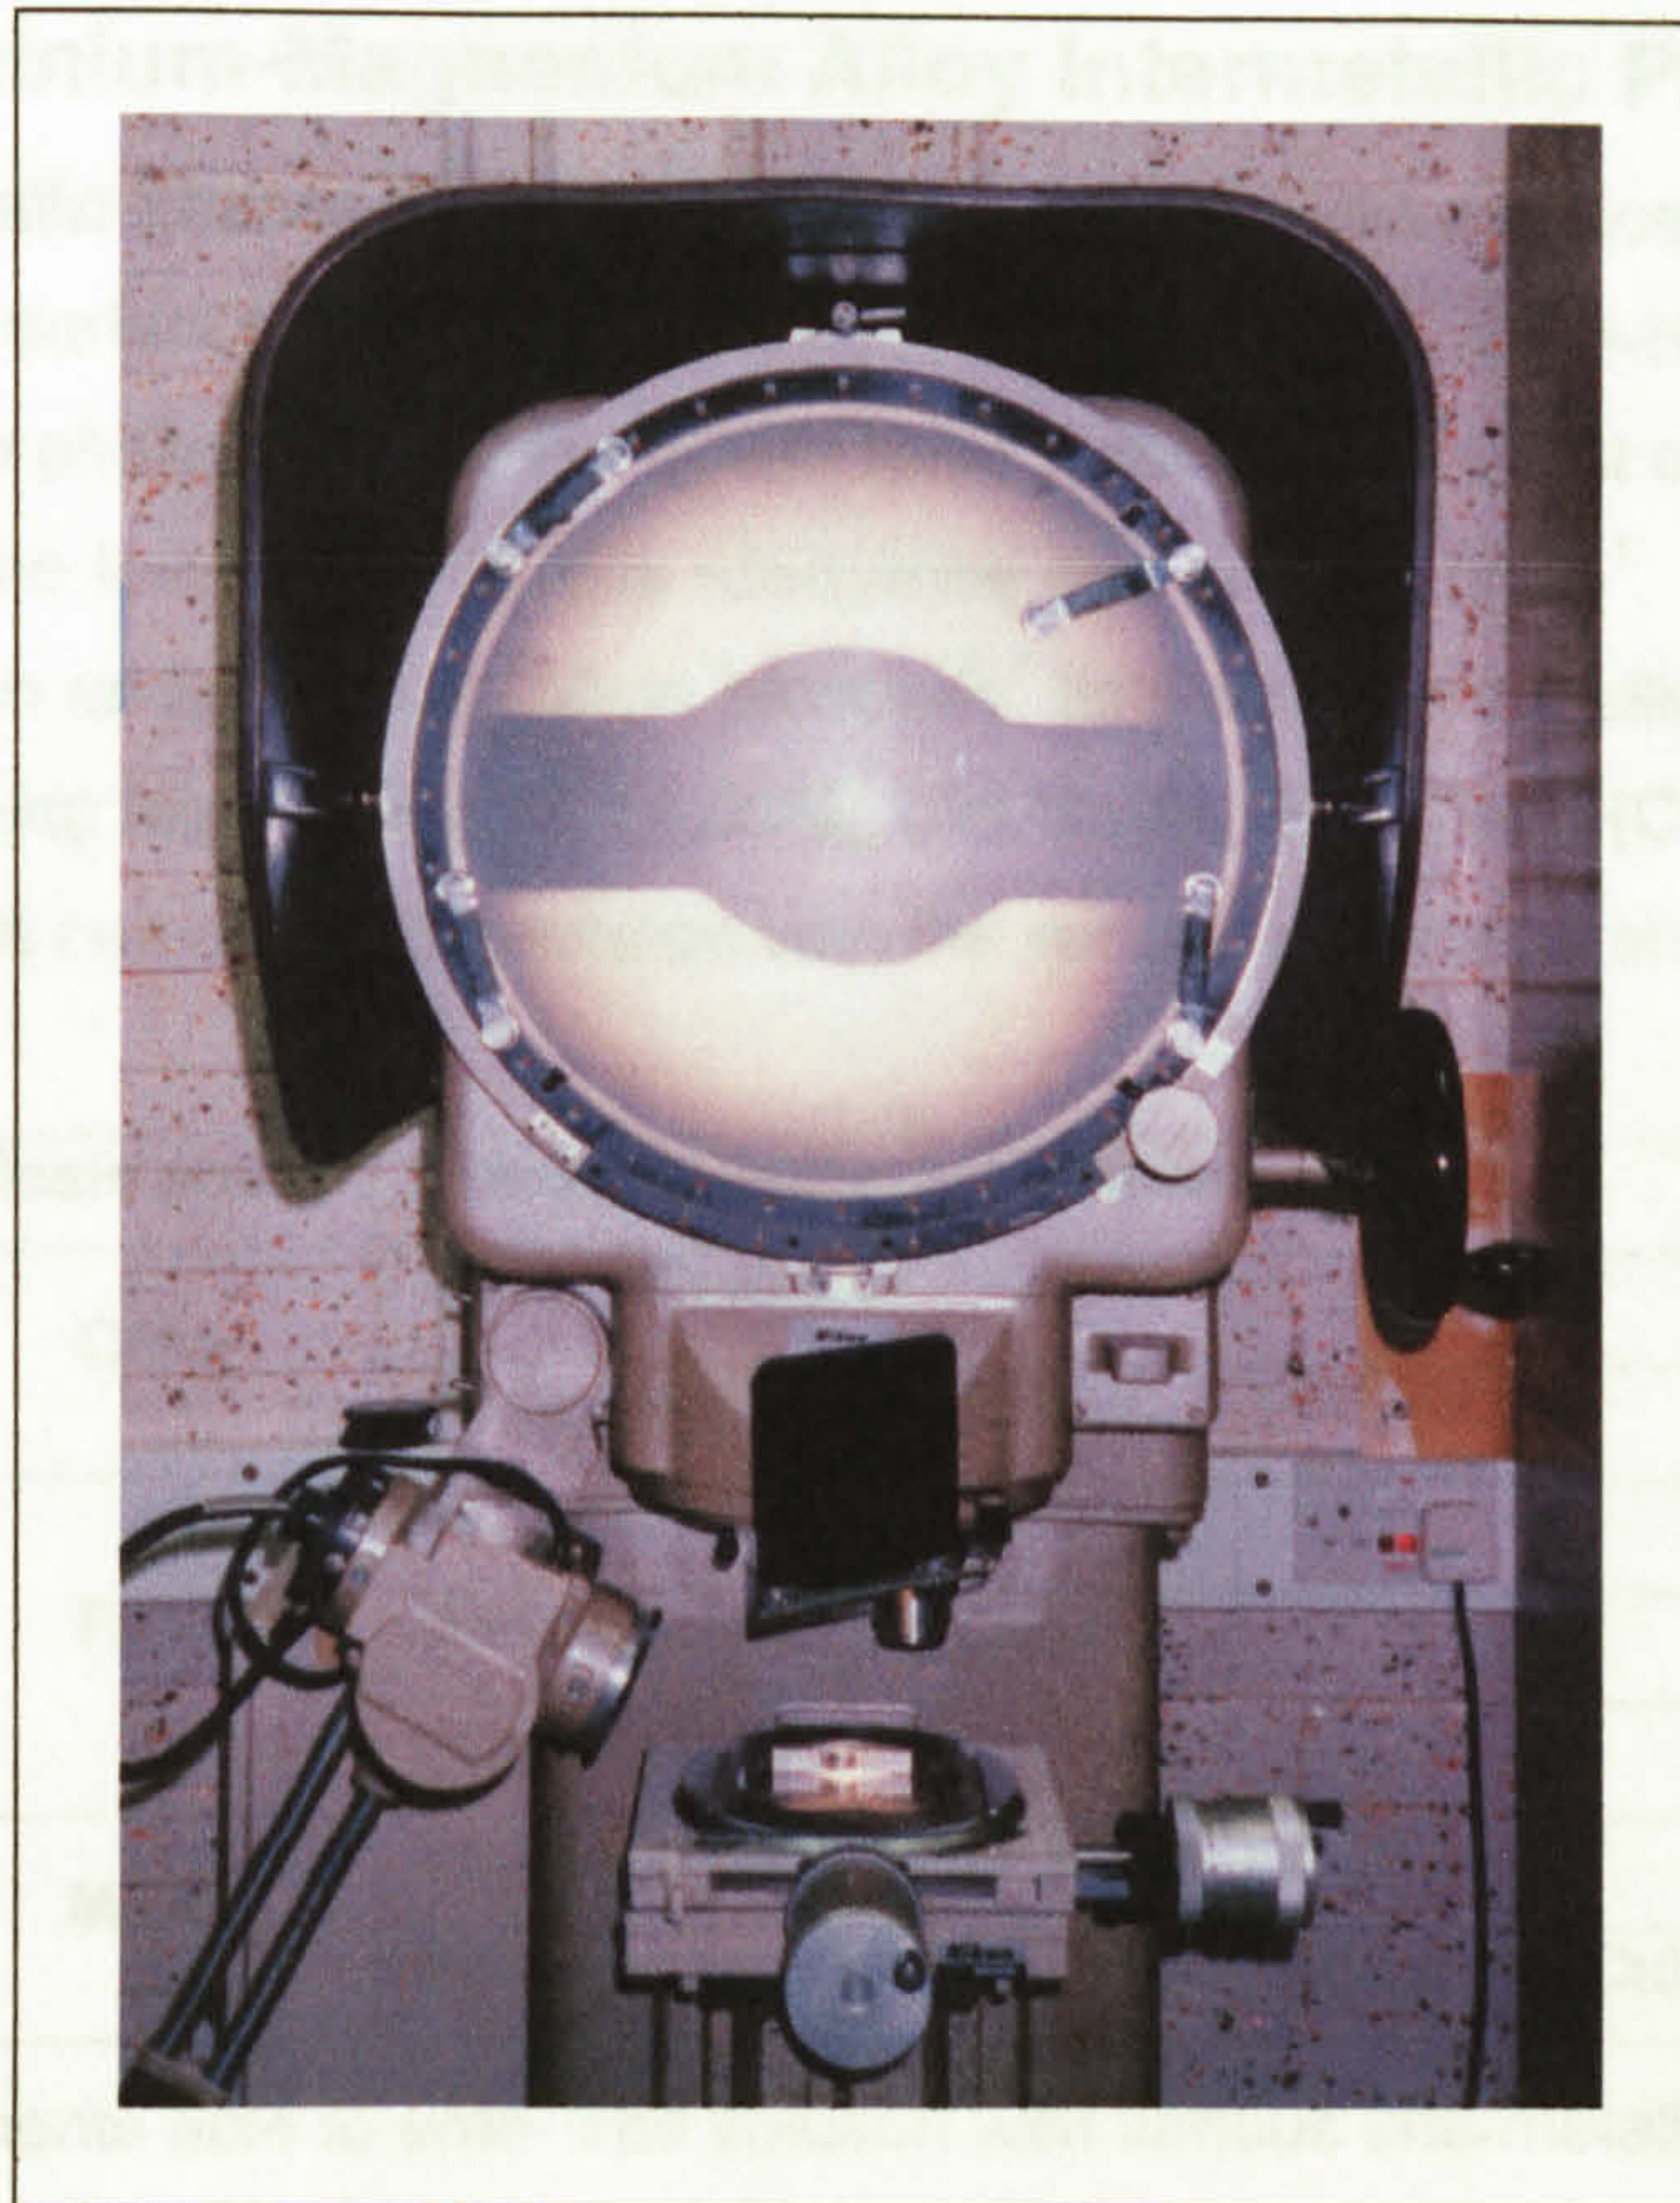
Nikon projector with the cross section of a MIG HI weld visible.
